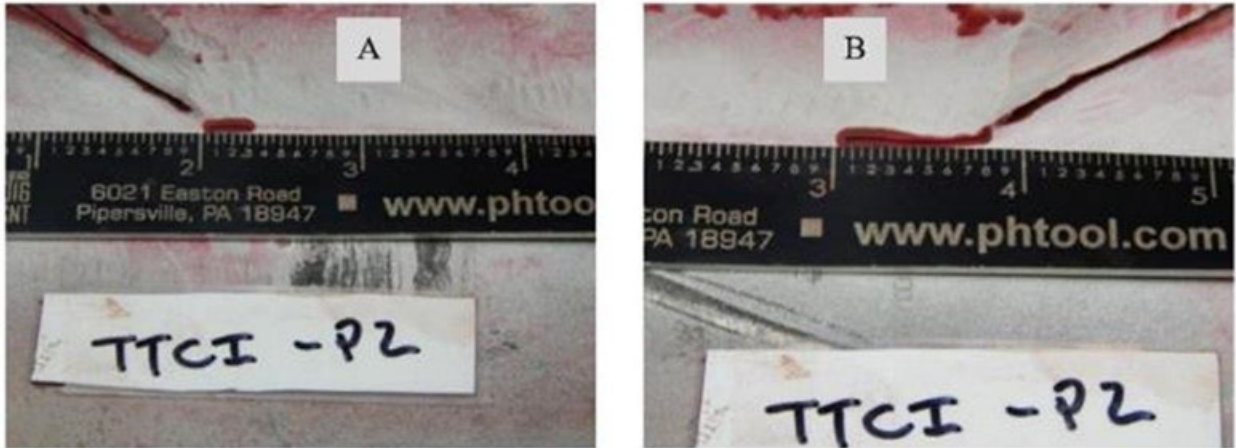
TTCI-P2 EDM notch fillet weld mg panel
